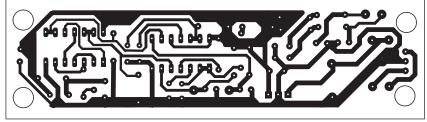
Actual-size single side PCB layout for the circuit in Fig. 1
